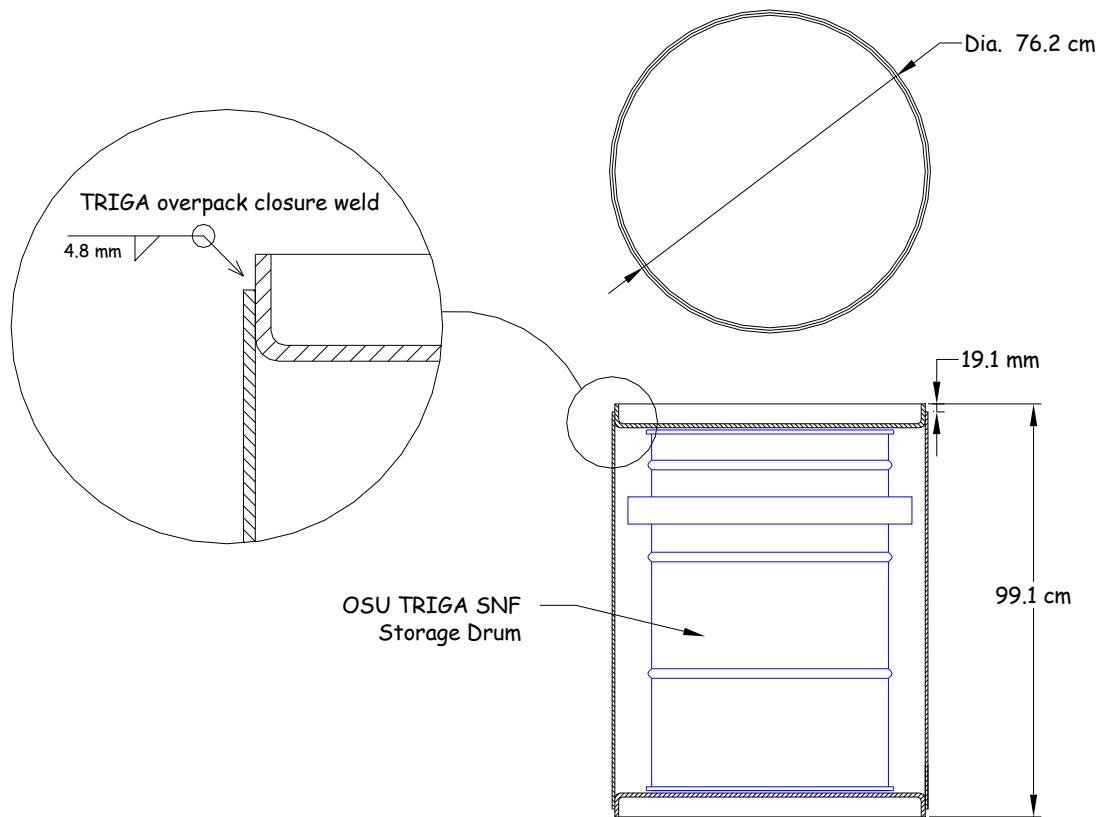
Overpack sketch and closure weld joint design.
